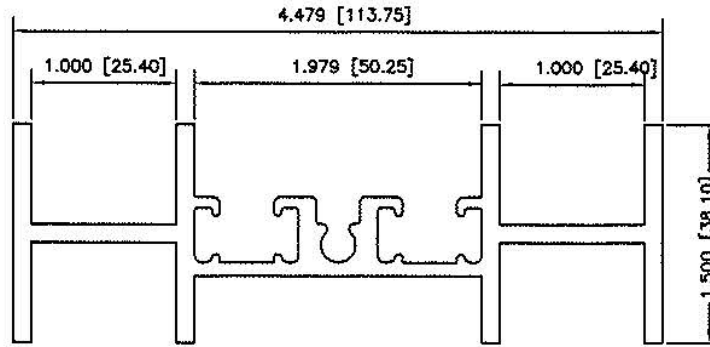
AAMA Die Profile Drawing for Poured & Debrided
